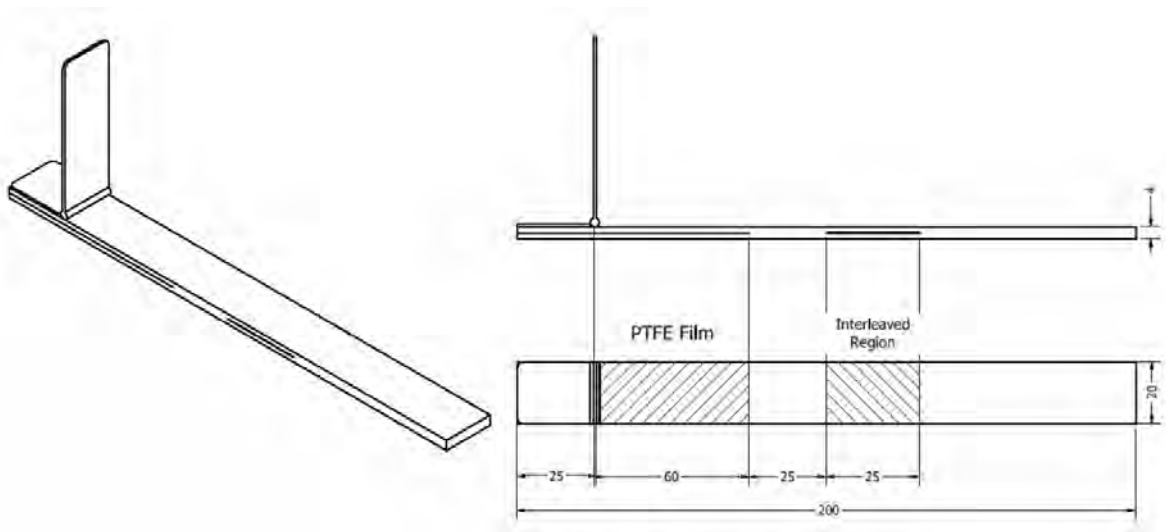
Geometric dimensions of the ELS specimens (all dimensions in mm).
